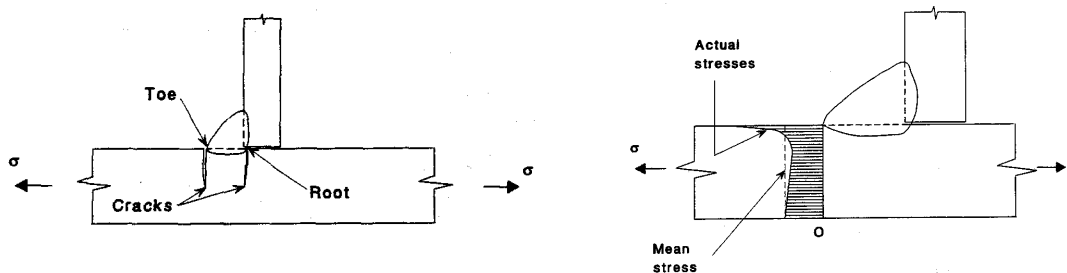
Discontinuities, stress peaks and cracks at the toe of a fillet weld
